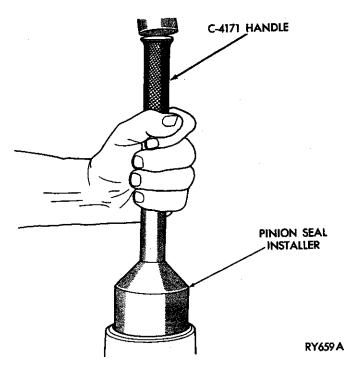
Drive Pinion Gear Shaft Seal Installation
